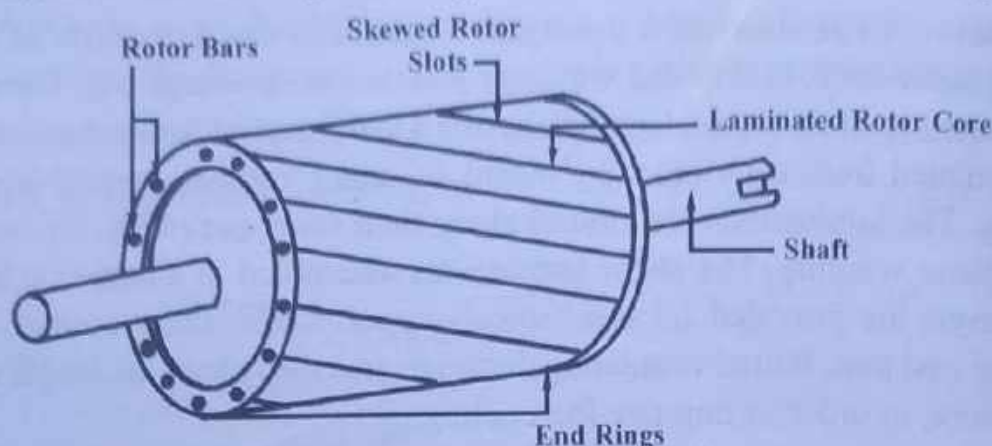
Construction Details of Squirrel Cage Rotor
